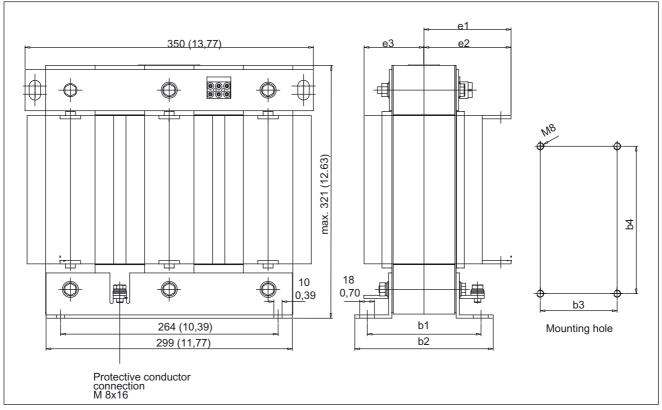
Dimension drawing: Motor reactor, frame size FSF
